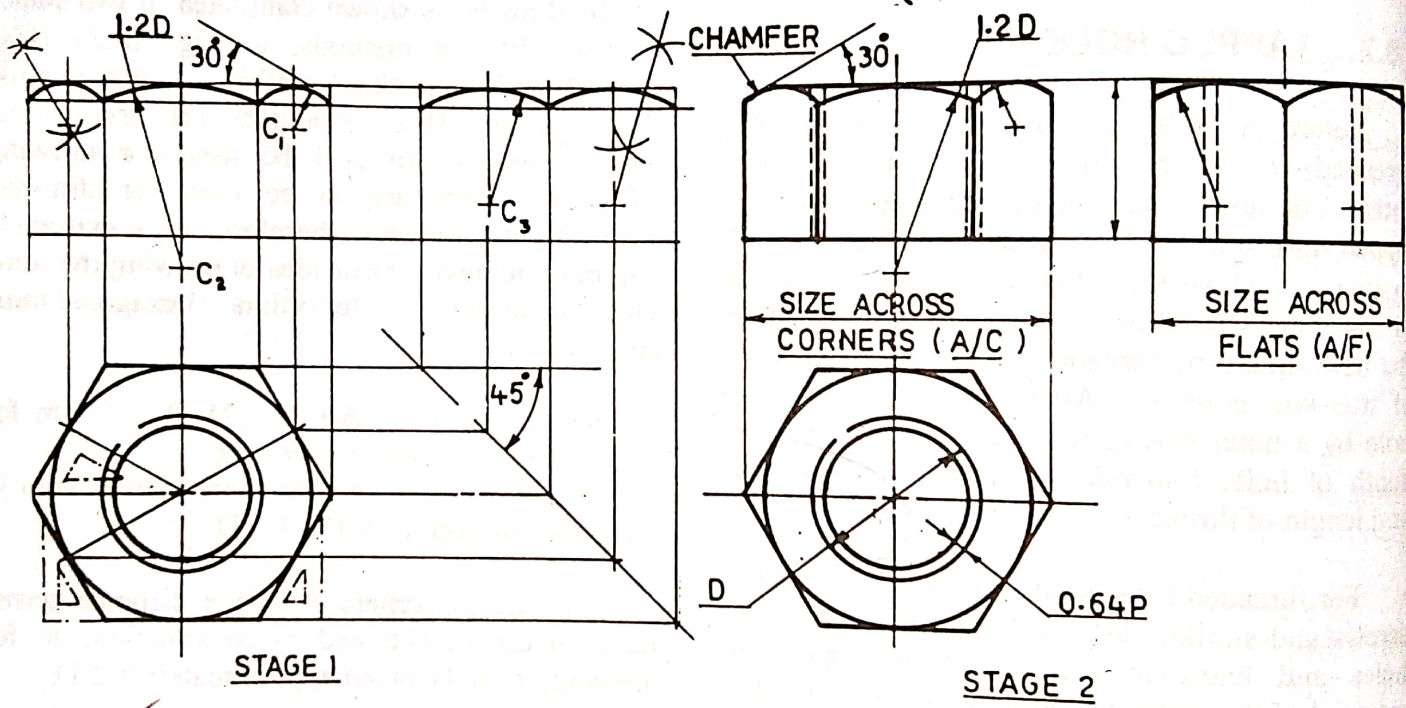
Drawing a Hexagonal Nut (BSW)
